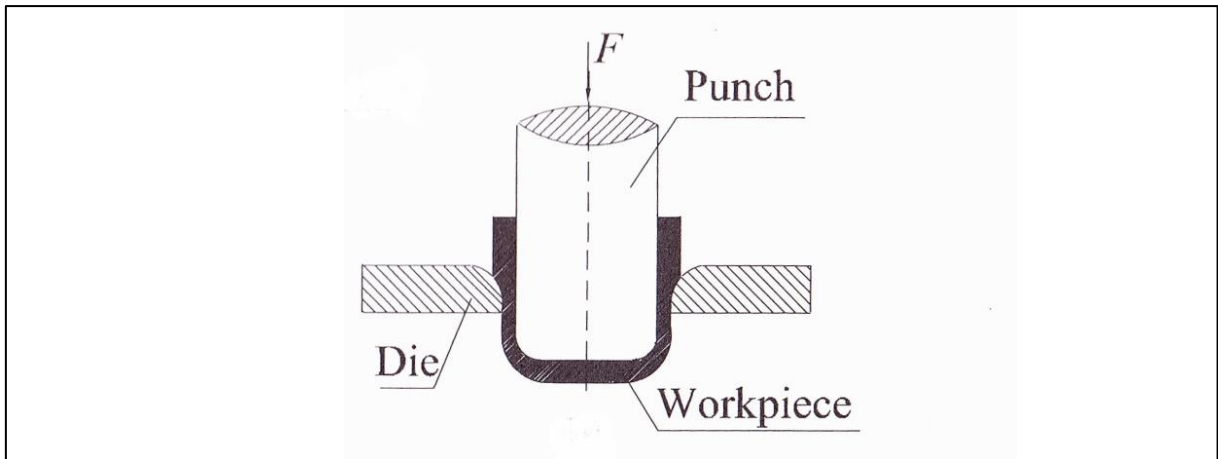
Deep Drawing Process: Ironing⁸⁶
